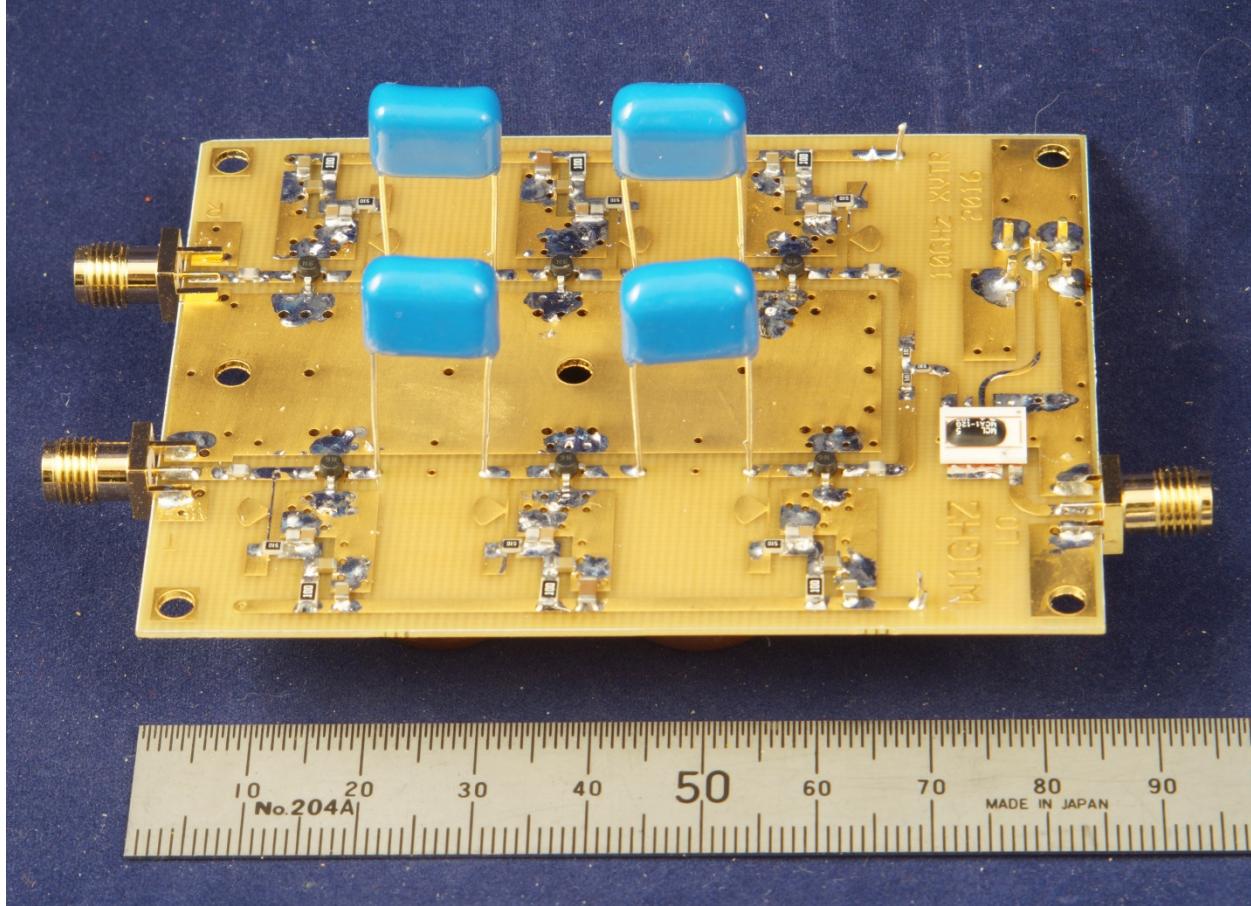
Capacitors with perfect lead spacing make probe assembly easier
